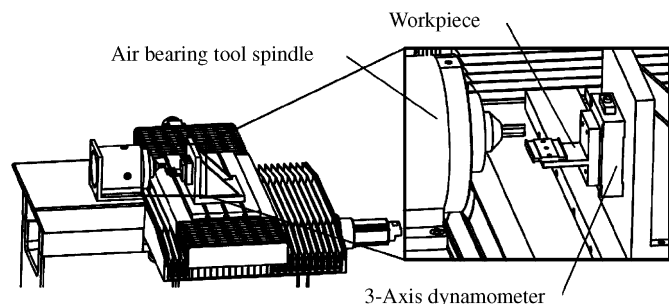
Two-axis milling machine with air bearing spindle. The dynamometer and *T*-base mount with workpiece are also shown.
